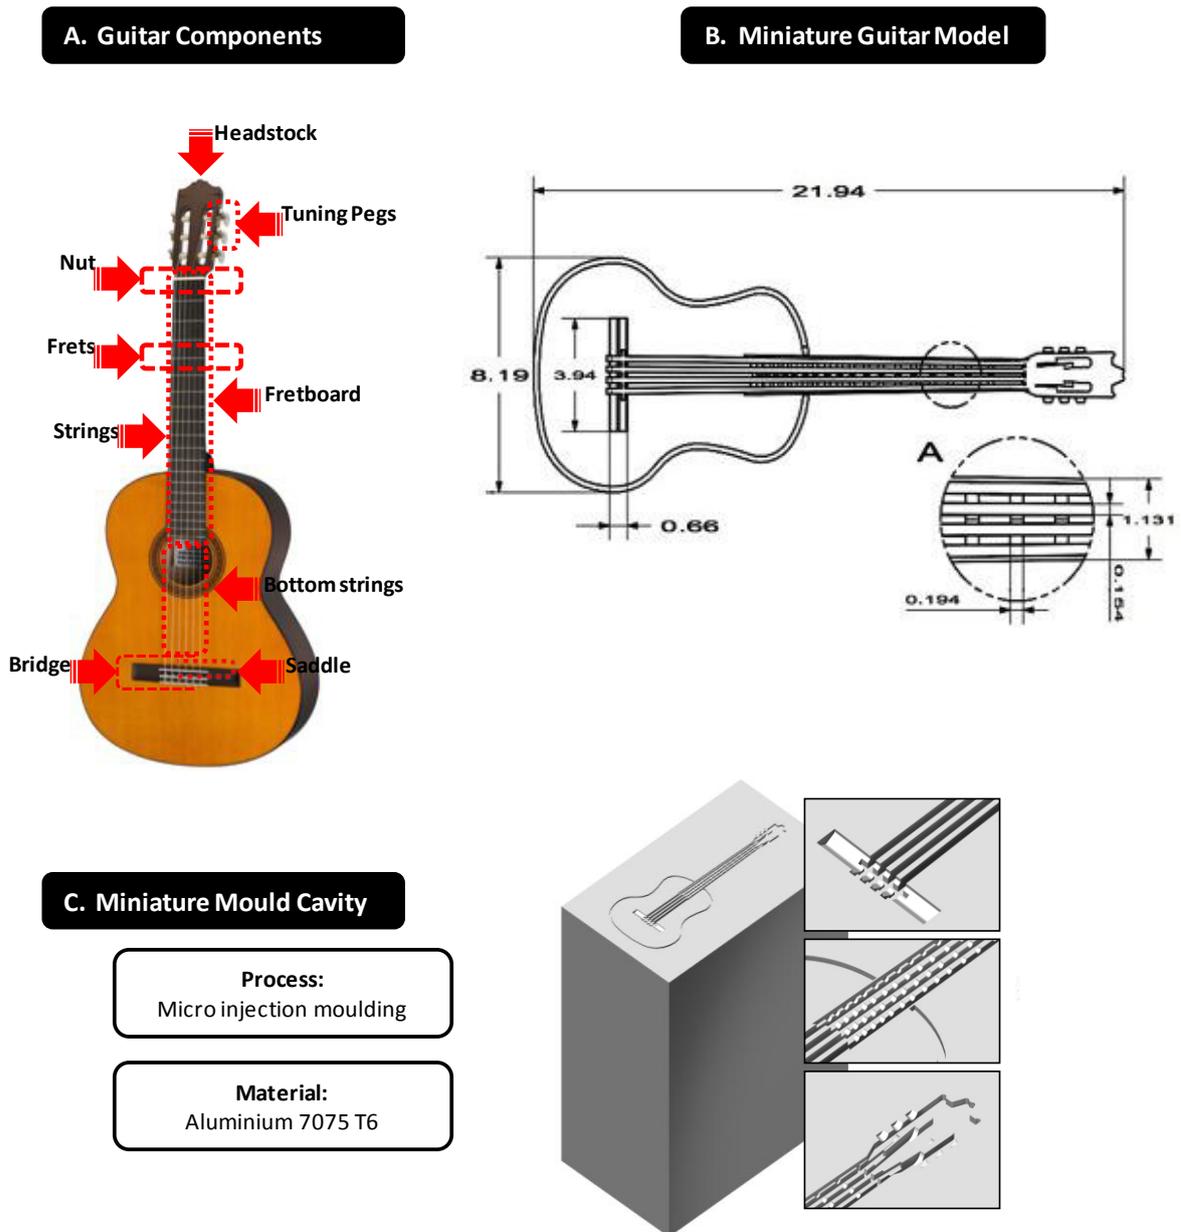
Test part: miniature mould cavity for ultrasonic moulding.
